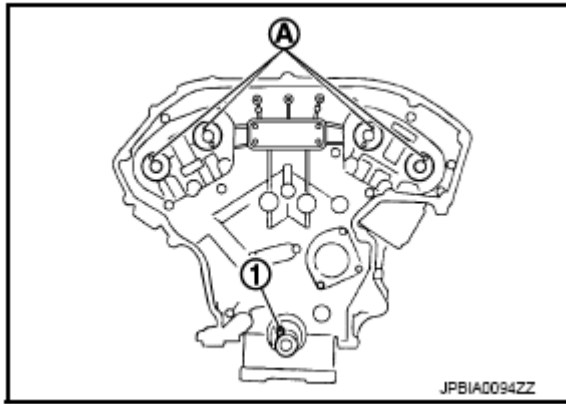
Identifying Crankshaft Key And Dowel Pin
